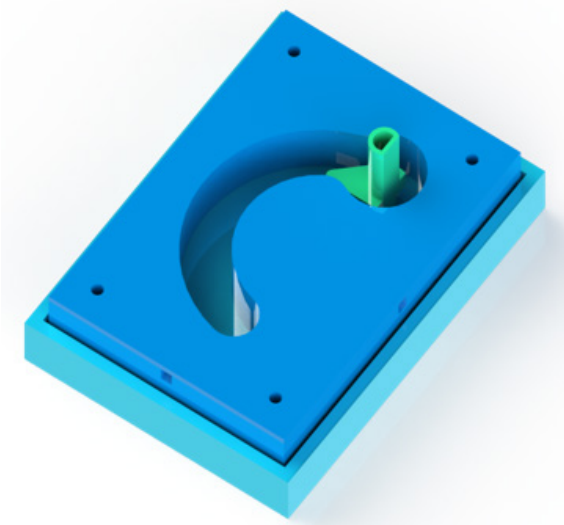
The CAD drawing of the mold for manufacturing the c-shaped leg. The light blue part is the bottom part of the mold, and the dark blue is the top part. The yellow part is the camshaft.
